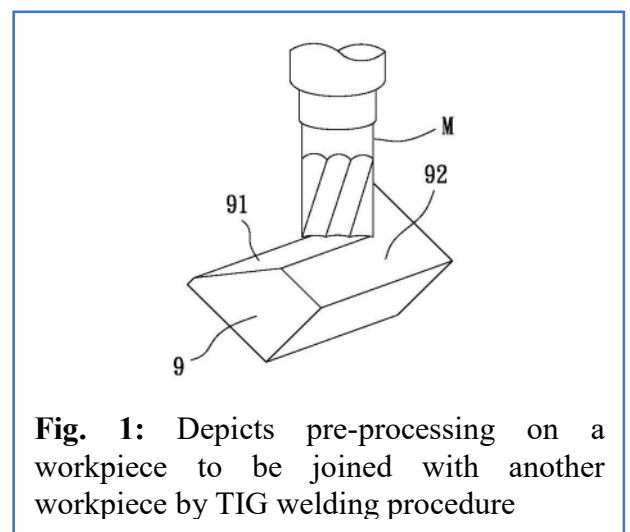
Depicts pre-processing on a workpiece to be joined with another workpiece by TIG welding procedure
